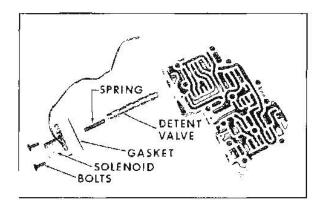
Downshift Solenoid and Detent Valve - Exploded View
